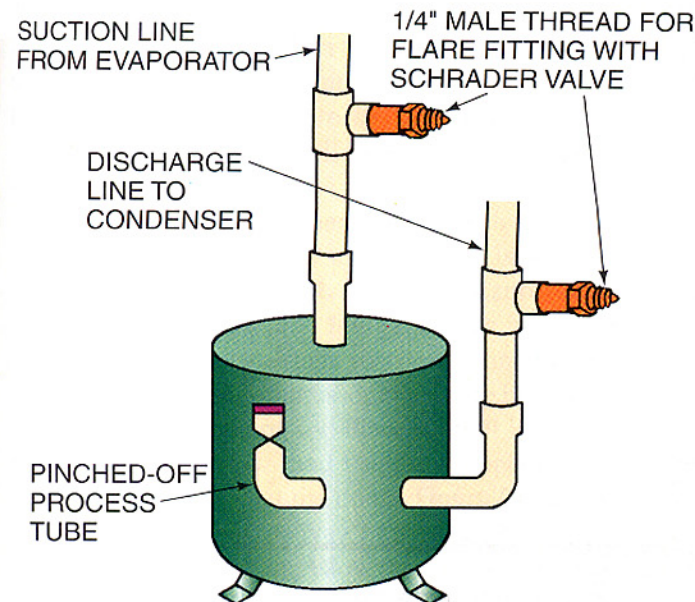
A "tee" fitting may be soldered in the suction and discharge lines for service connection while the system is open.
